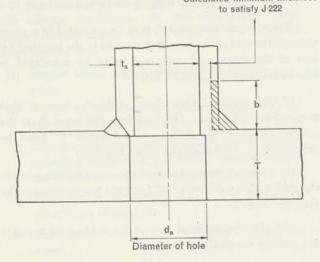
Compensation of Welded Tube Stubs
